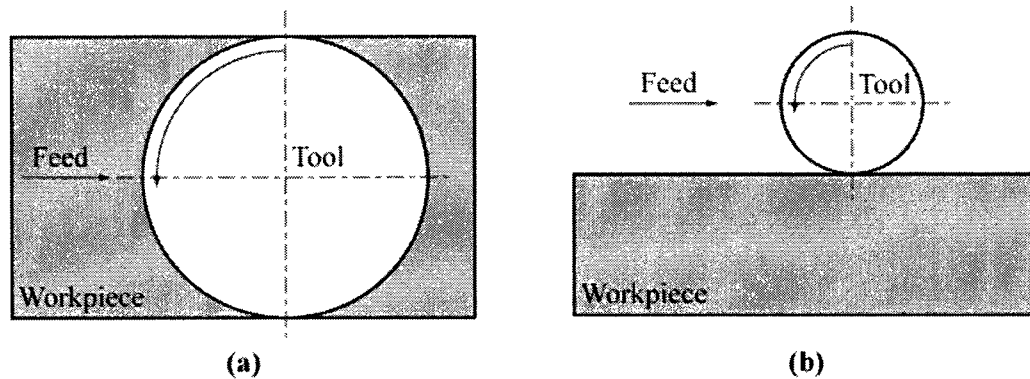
(a) Face milling, (b) peripheral milling.
